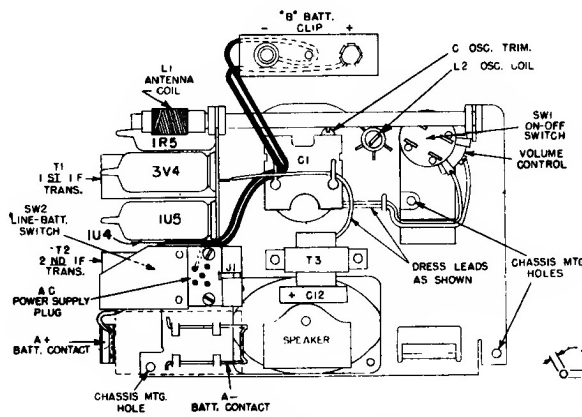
REAR VIEW OF V-2182-1 CHASSIS
